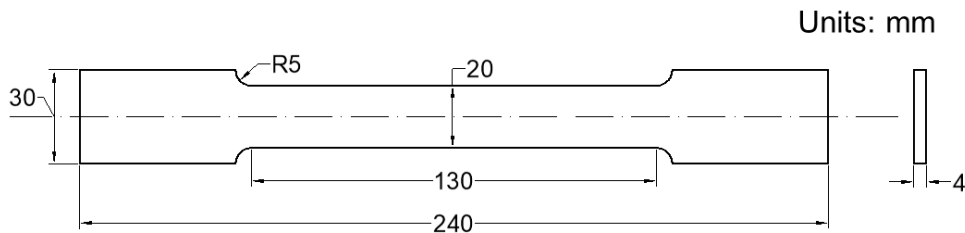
Geometry and dimensions (mm) of the flat tensile specimens according to ISO 6892-1 [24]
